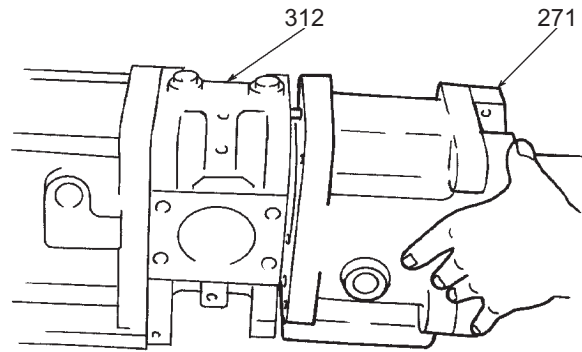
Disassembling the pump casing (271) and the valve block (312)
